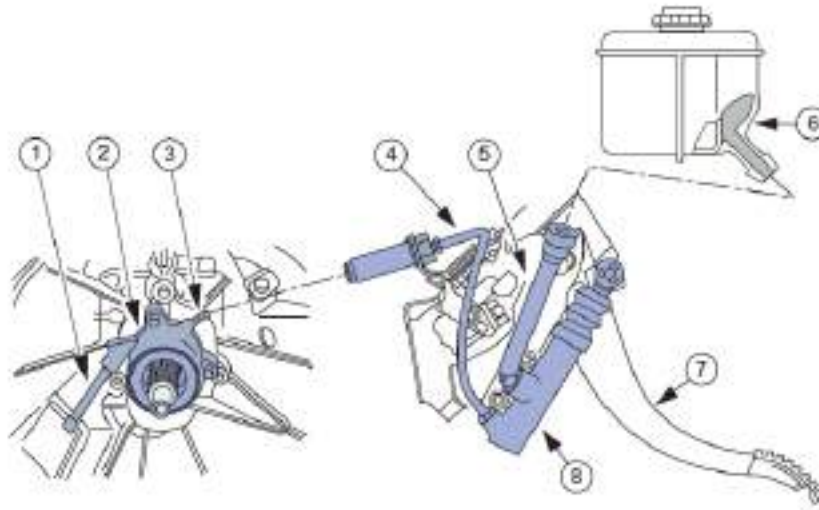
Clutch hydraulic components: 1, bleed valve; 2, slave cylinder; 3, pressure pipe connection; 4, pressure pipe; 5, replenishing pipe; 6, fluid reservoir; 7, clutch pedal; 8, master cylinder
